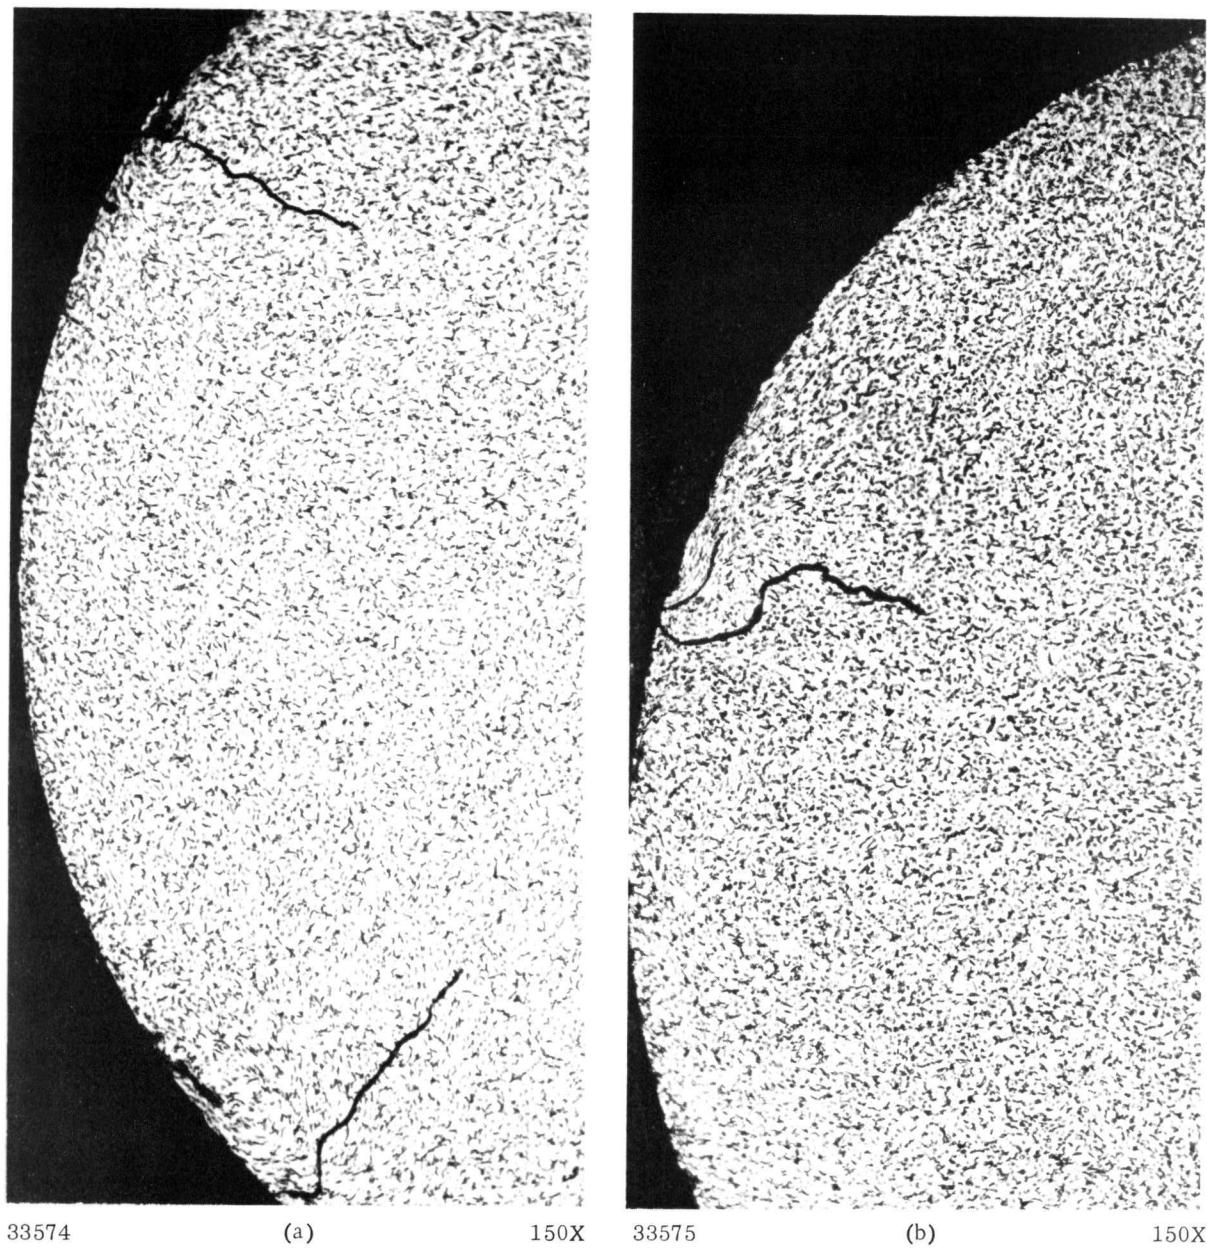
Transverse sections showing cracks in zirconium wire located by the nondestructive test equipment.
